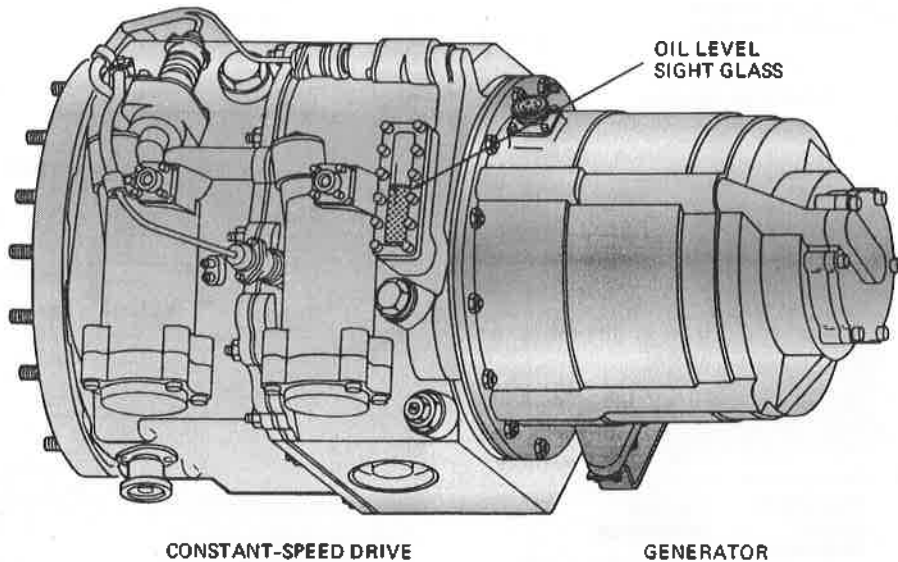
A typical constant-speed drive and generator assembly. (Sundstrand Corporation.)
